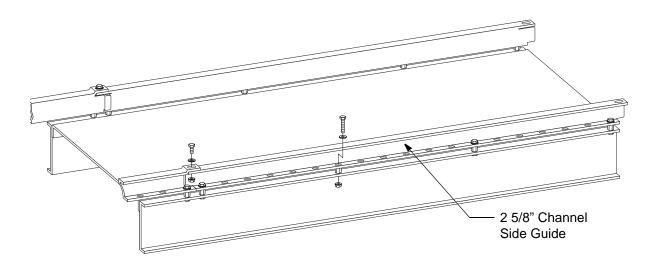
Channel Side Guides, 2 5/8" Channel Shown, Spaced Mounting
